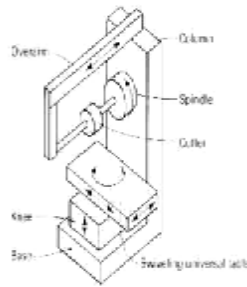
Principal components of a universal horizontal knee-and-column milling machine
